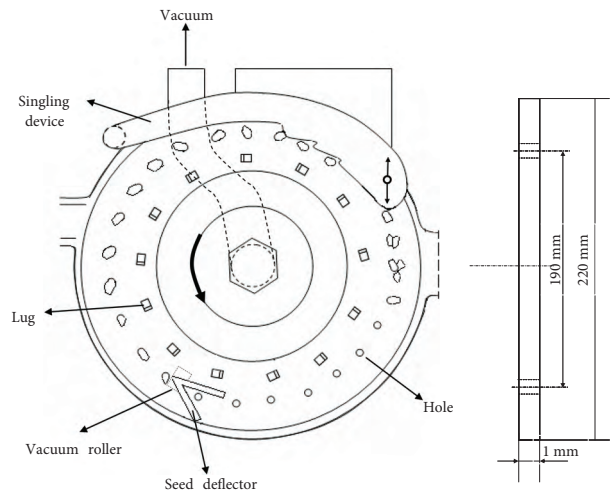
Metering unit of the vacuum type precision seeder and dimensions of the vacuum plate.
